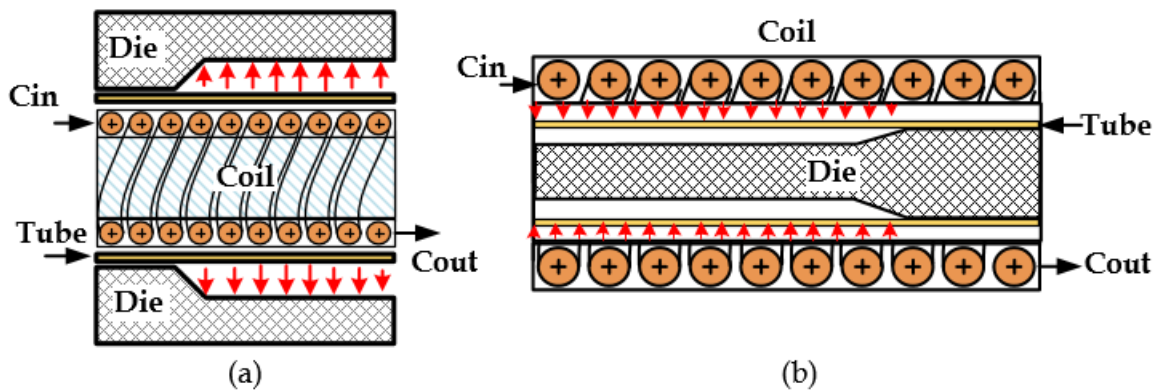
(a) EM expansion and (b) EM compression of the tube
